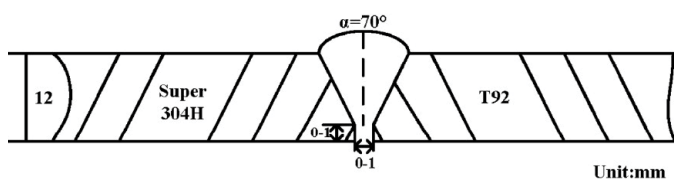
Schematic diagram of welding process of T92/Super 304H dissimilar weld joints
